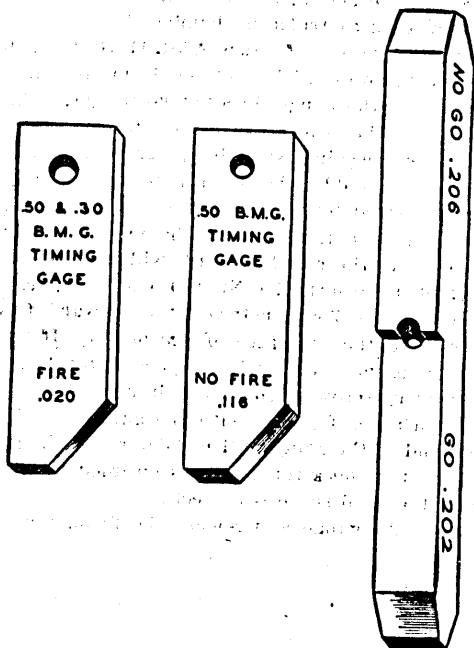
Head space and timing gauge assembly A351217.
